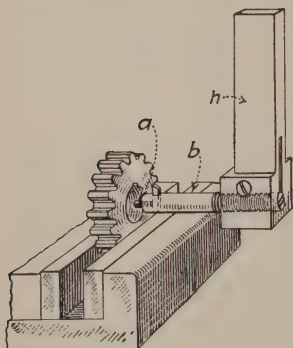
Planing a keyway in a gear. (See also Fig. 97.)
